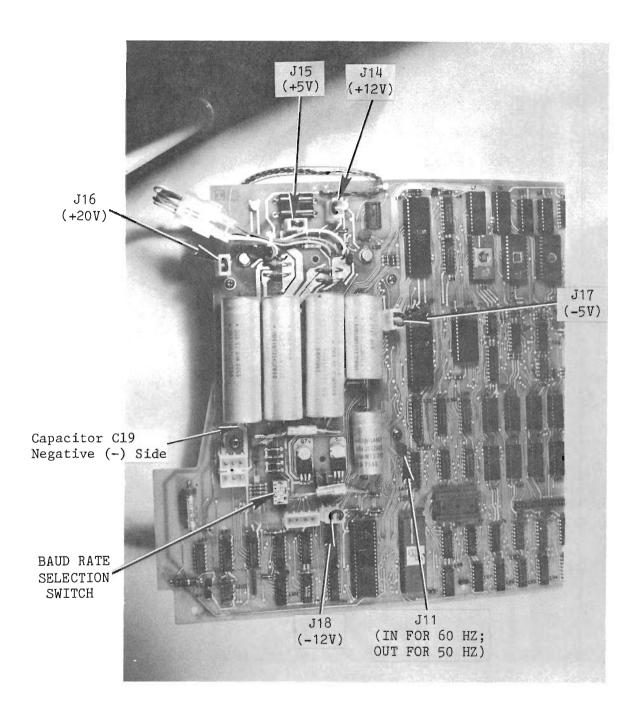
Jumper Locations (210-7592 PCB) and Baud Rate Selection Switch
